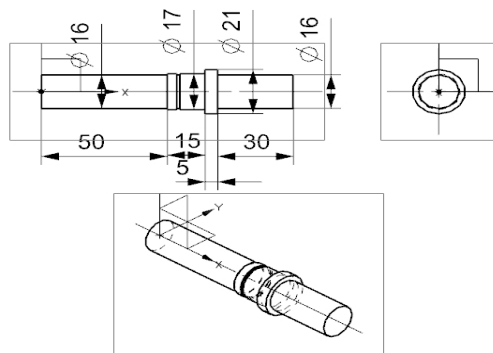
2-D Drawing Of Input Shaft.
